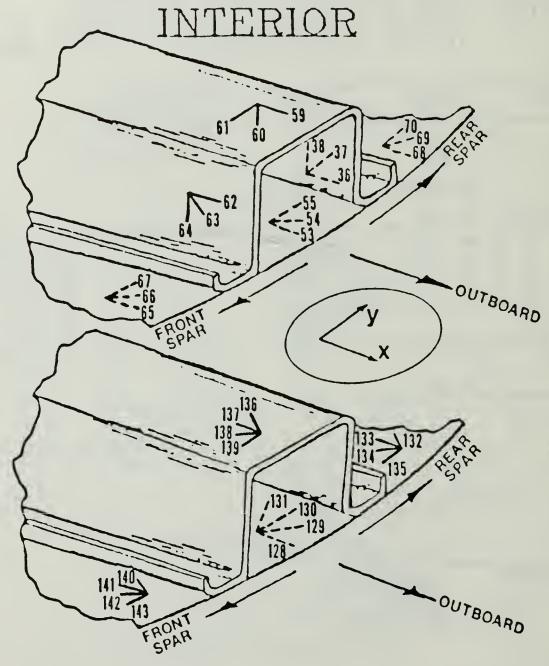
A P2V Starboard Wing Strain Gage Locations, Bottom of Test Section, Interior.
